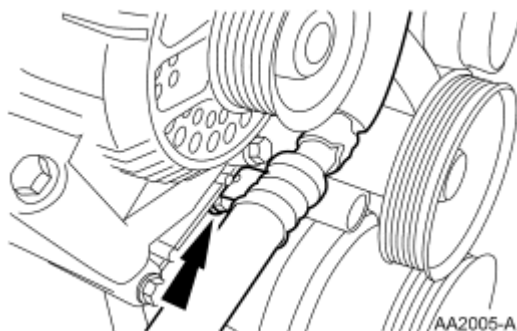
Locating A/C Suction/Discharge Tube & Nut
